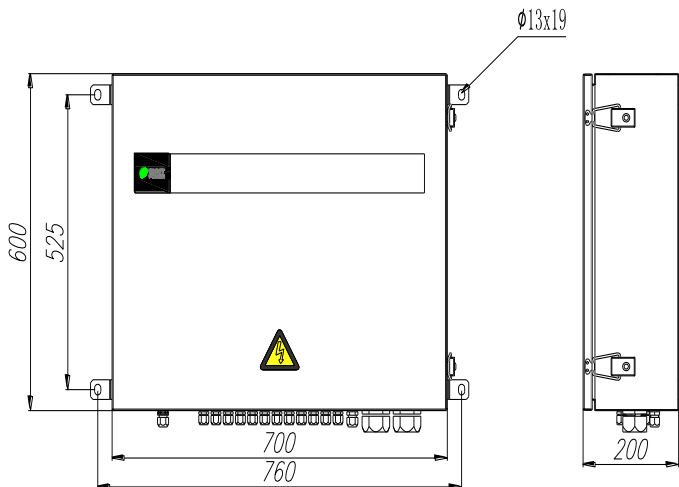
Dimensions of the CPS CB10S,CPS CB12S,CPS CB14S,CPS CB16S-E1 PV combiner box
